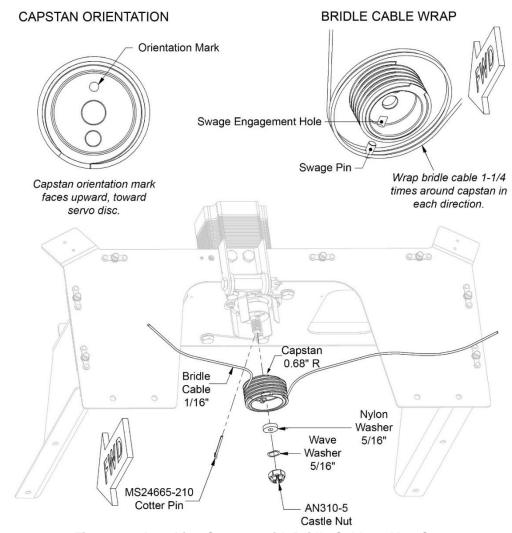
Attaching Capstan with Bridle Cable to Yaw Servo
